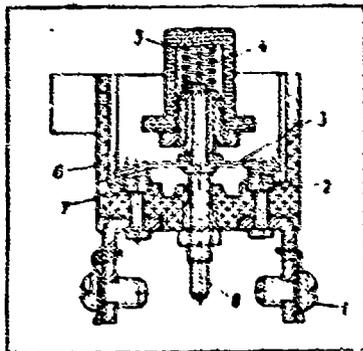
Button Type Circuit Breaker: 1, terminal screw, 2 and 7, terminals, 3, bimetallic plate, 4, spring, 5, button, 6, body, 8, adjusting screw.
